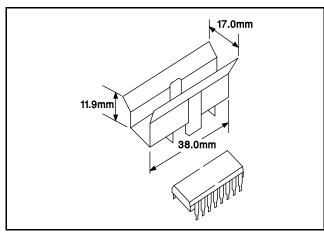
External Heatsink Mounting Example (θJA = 25°C/W)
